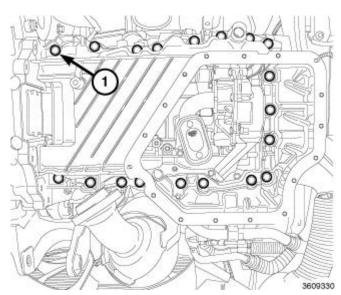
Oil Pan Mounting Bolts Courtesy of CHRYSLER GROUP, LLC
